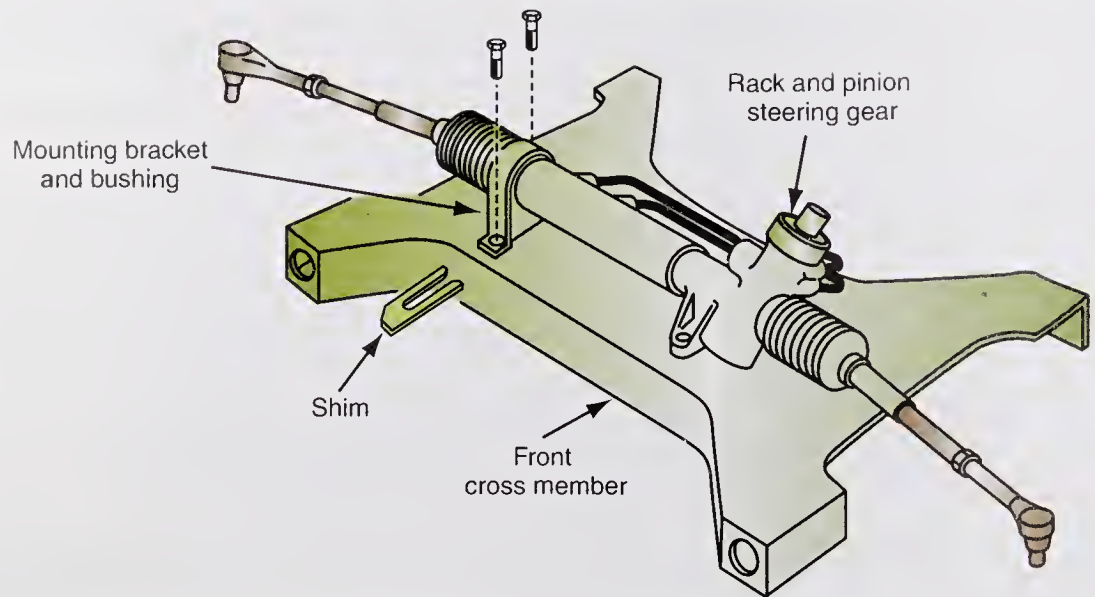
On some imported vehicles, shims between the rack and pinion steering gear and the chassis adjust the steering linkage height.
